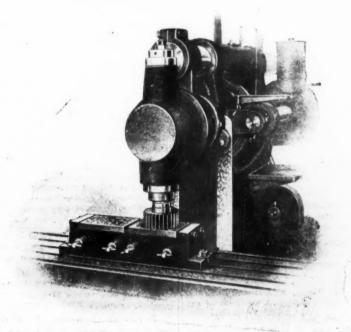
VERTICAL SPINDLE MILLING CAST-IRON PIECES 4 3-16" WIDE AT A TABLE FEED OF 13" PER MINUTE ON A No. 3 PLAIN CINCINNATI GEARED-FEED MILLER.
